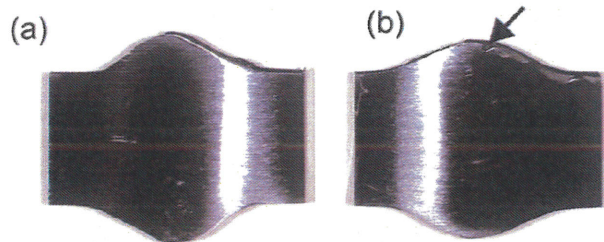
Cross sectional appearance of weld in (a) suggested and (b) “heat shortage” condition.
